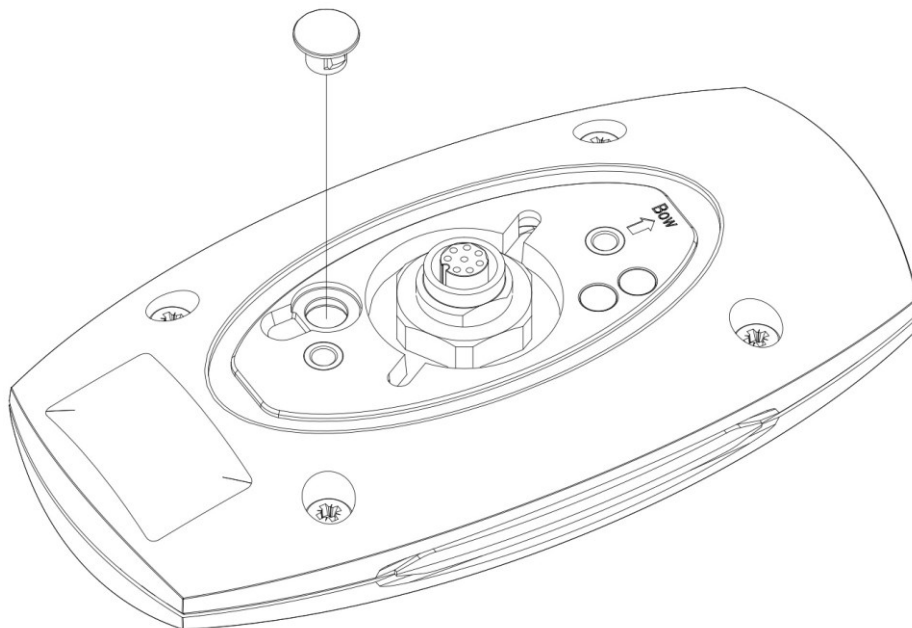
POLE MOUNT INSTALLATION STEP 2 (REMOVE CAP FOR DIP-SWITCH SETTINGS)
